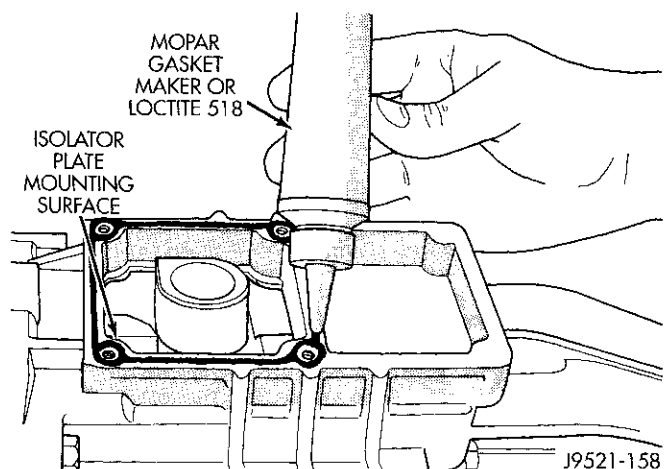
Applying Sealer To Shift Tower Mounting Surface
